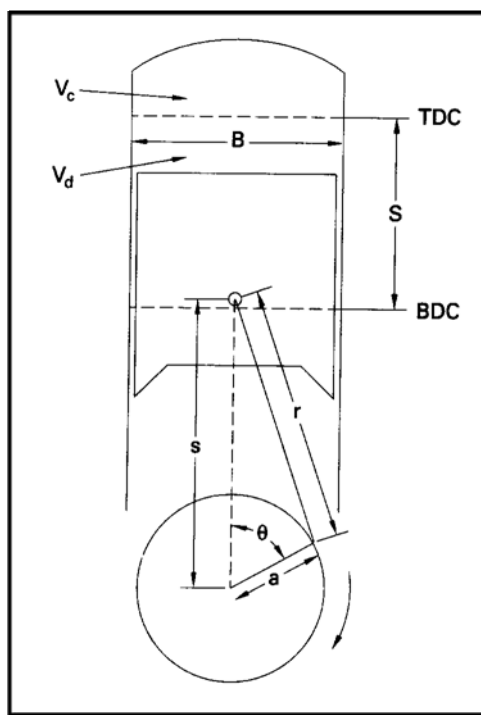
Piston and cylinder geometry of reciprocating engine.
